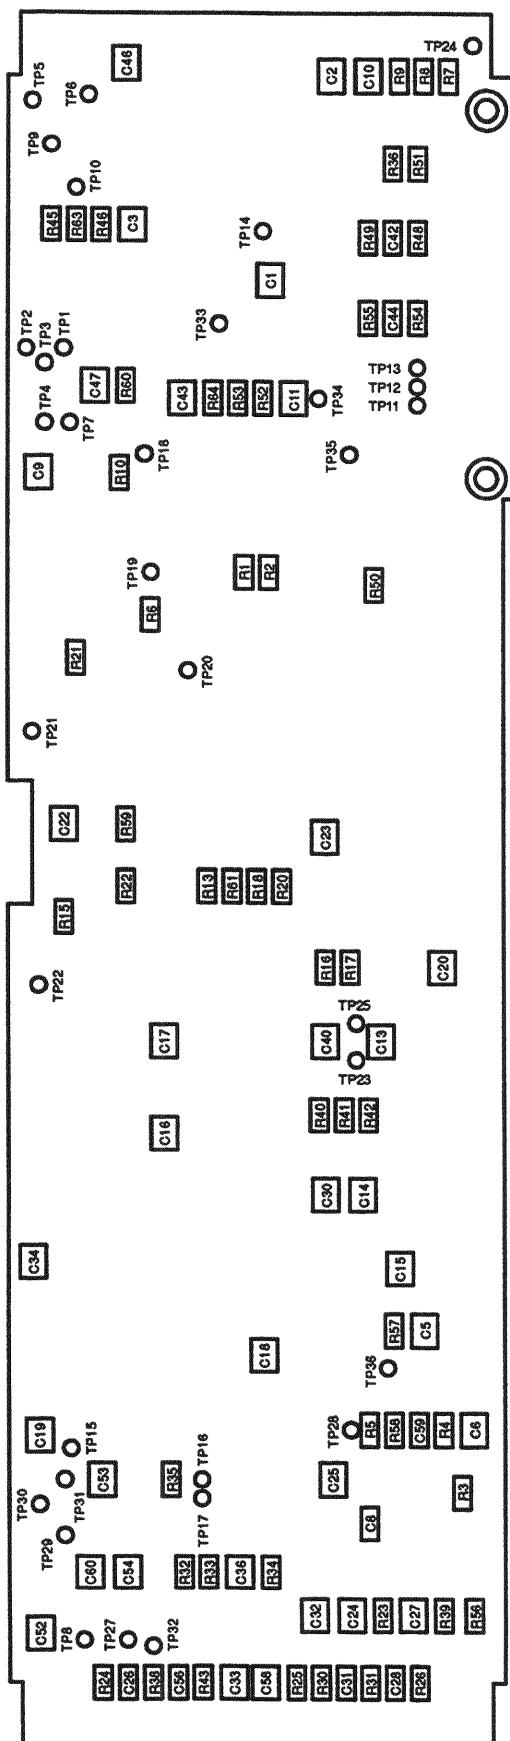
A3 LPC PWB Assembly Component Location Diagram (10372-3440 Rev. A) (Sheet 2 of 2)
